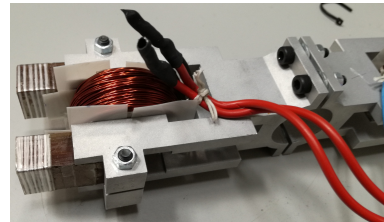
Assembly of the coil and stator module to the supporting frame.
